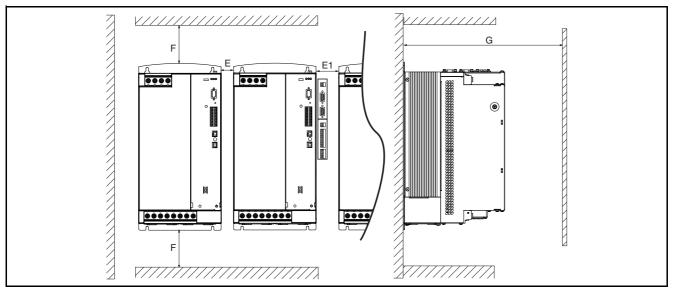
Mounting clearances wall mounting (dimensions see Table 2.1)
